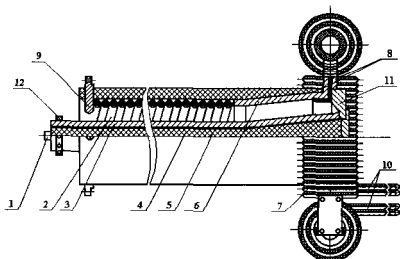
1 - detonator, 2 - multi-sectional helix (stator), 3 - metal tube (armature), 4 - HE-charge, 5 - plexiglas tube, 6 - conical coaxial area, 7 - transformer unit, 8 - MCG output, 9 - explosion close switch, 10 - transformer unit output, 11 - conical flange, 12 - fastening clamp.
